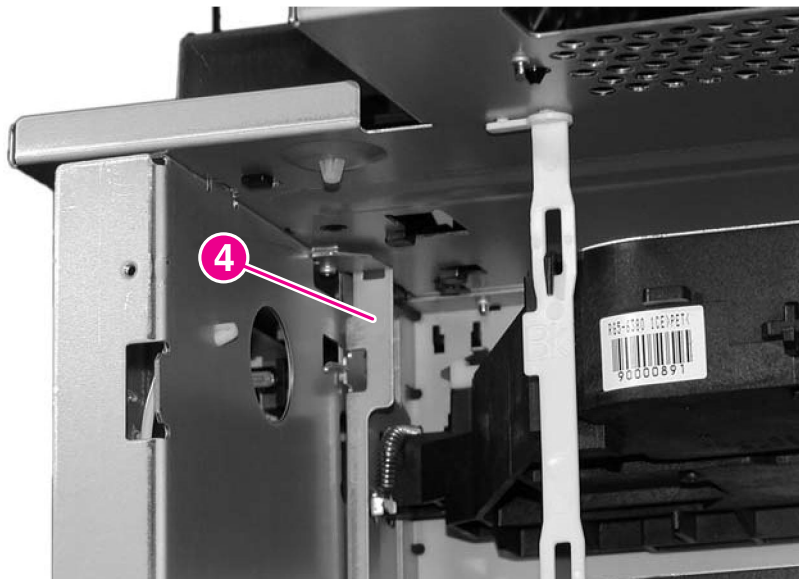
Remove the right side laser/scanner retaining bar (2 of 2, rear of printer)
